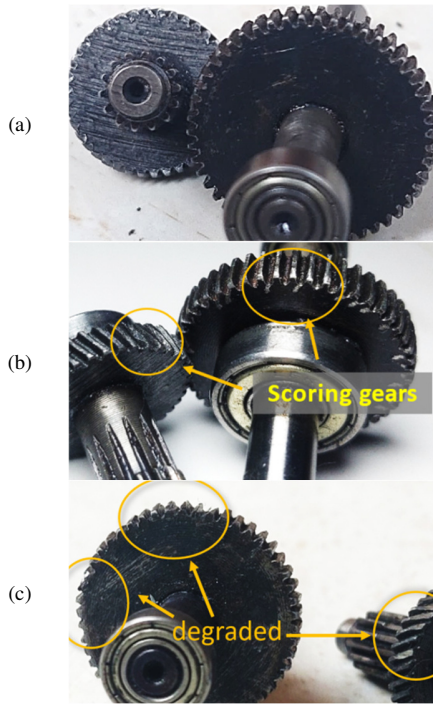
Gears used in conveyor gearboxes: (a) normal gear, (b) scoring gears, (c) damaged gear.
